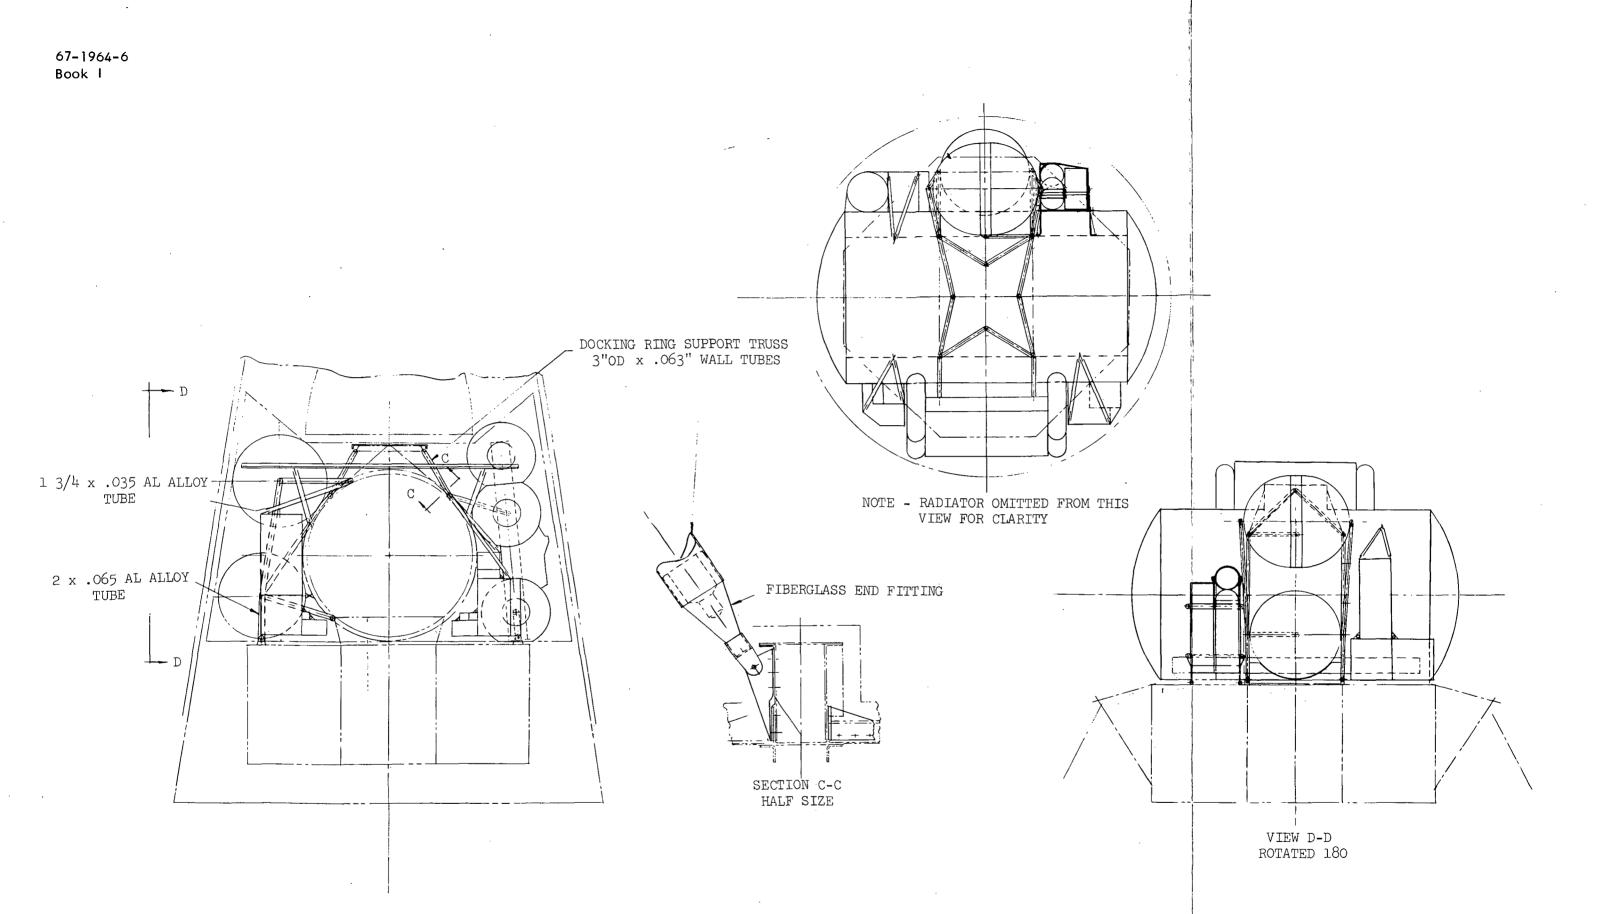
Configuration 3B Horizontal Cylinder Outboard Equipment Structural Arrangement - -
